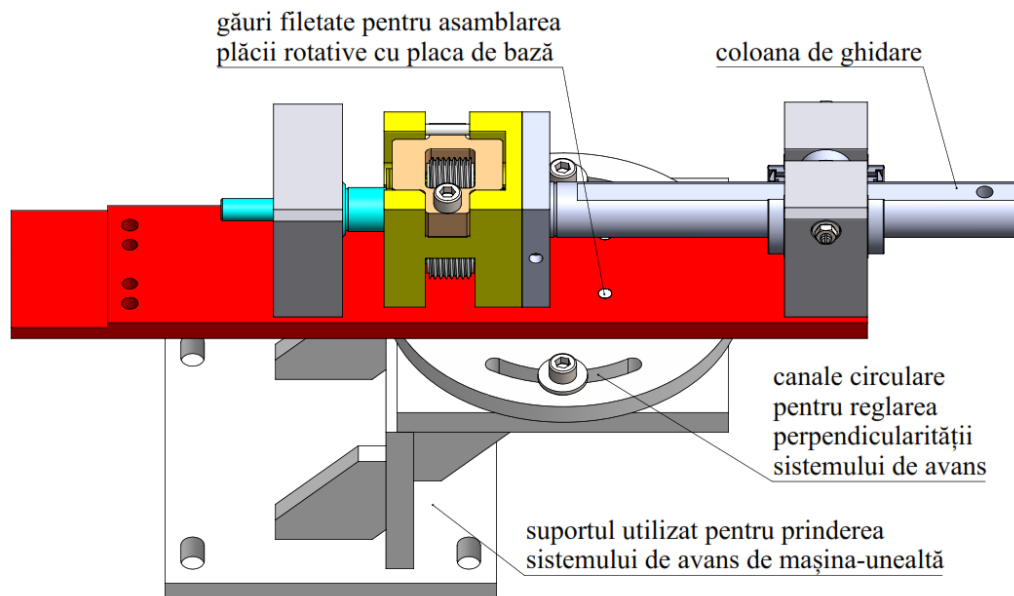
Feed system with the rotary plate for adjusting perpendicularity
